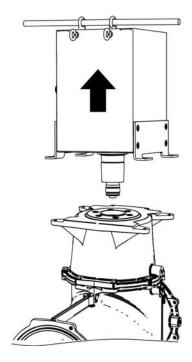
Removing the fixing bolts at the voltage transformer mounting plate
